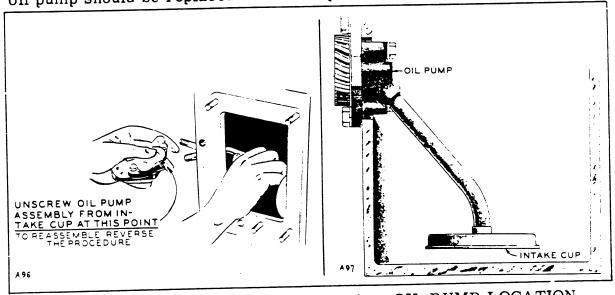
OIL PUMP REMOVAL FIG. 31 - OIL PUMP LOCATION
